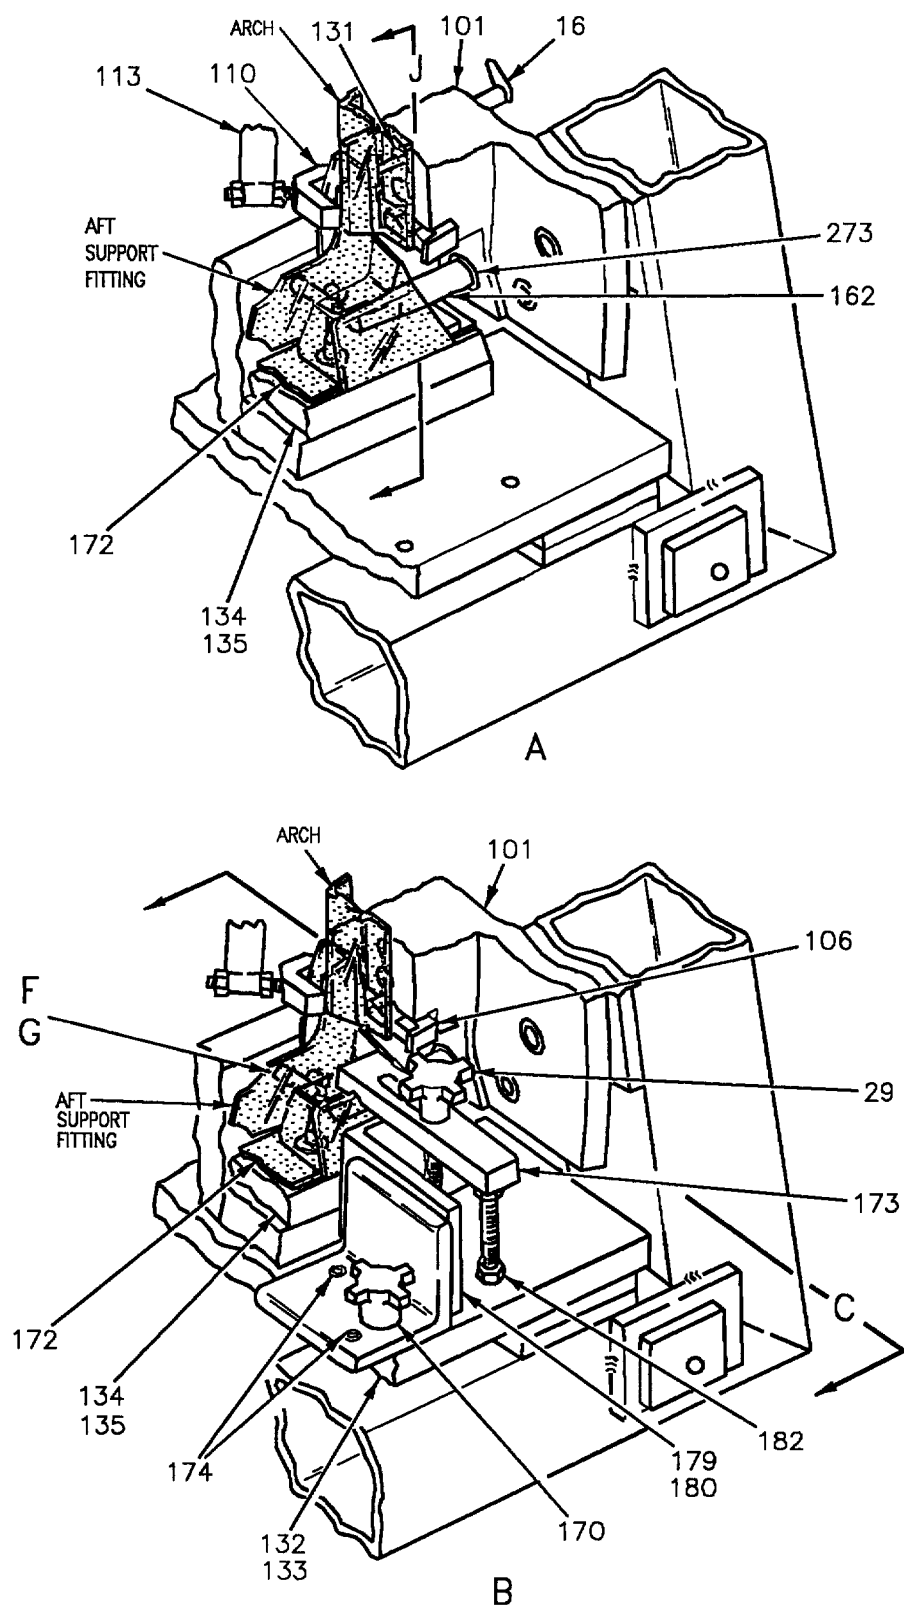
Inspection or Replacement - Aft Support Fitting (Sheet 2)
